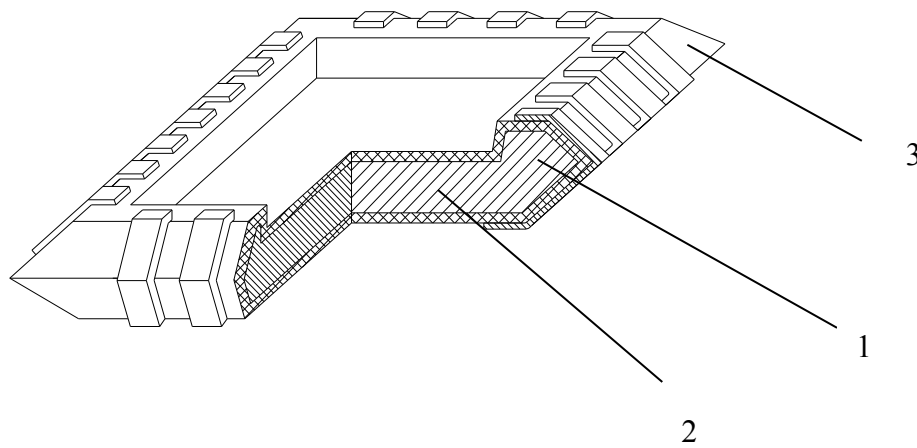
Leadless chip-carrier package: (1) aluminum base; (2) porous alumina layer; (3) external contact pads
